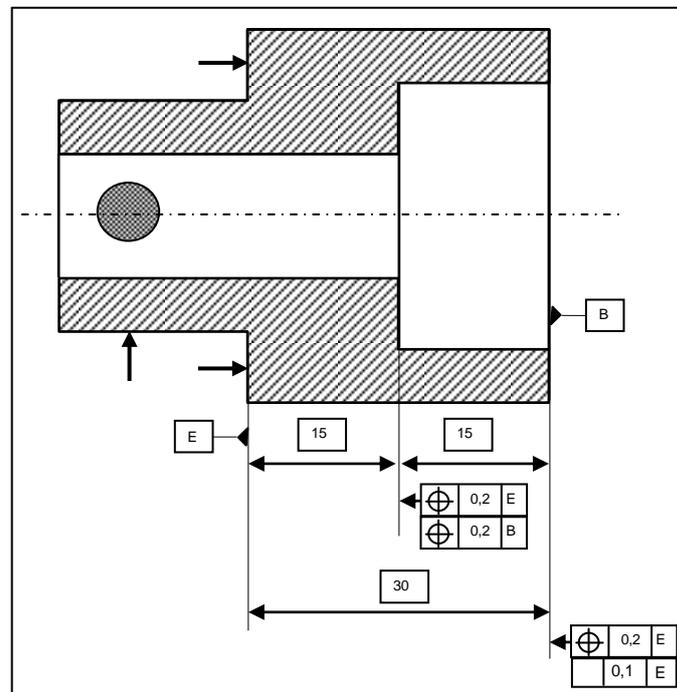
Manufacturing drawing of phase 20 of the turning workpiece after automatic treatment.
